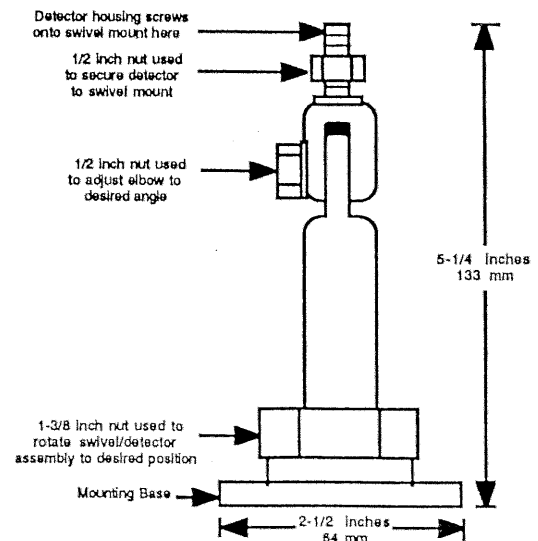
Q9001H Swivel Mounting Bracket (replaces nickel/brass and stainless steel Q9001B)
